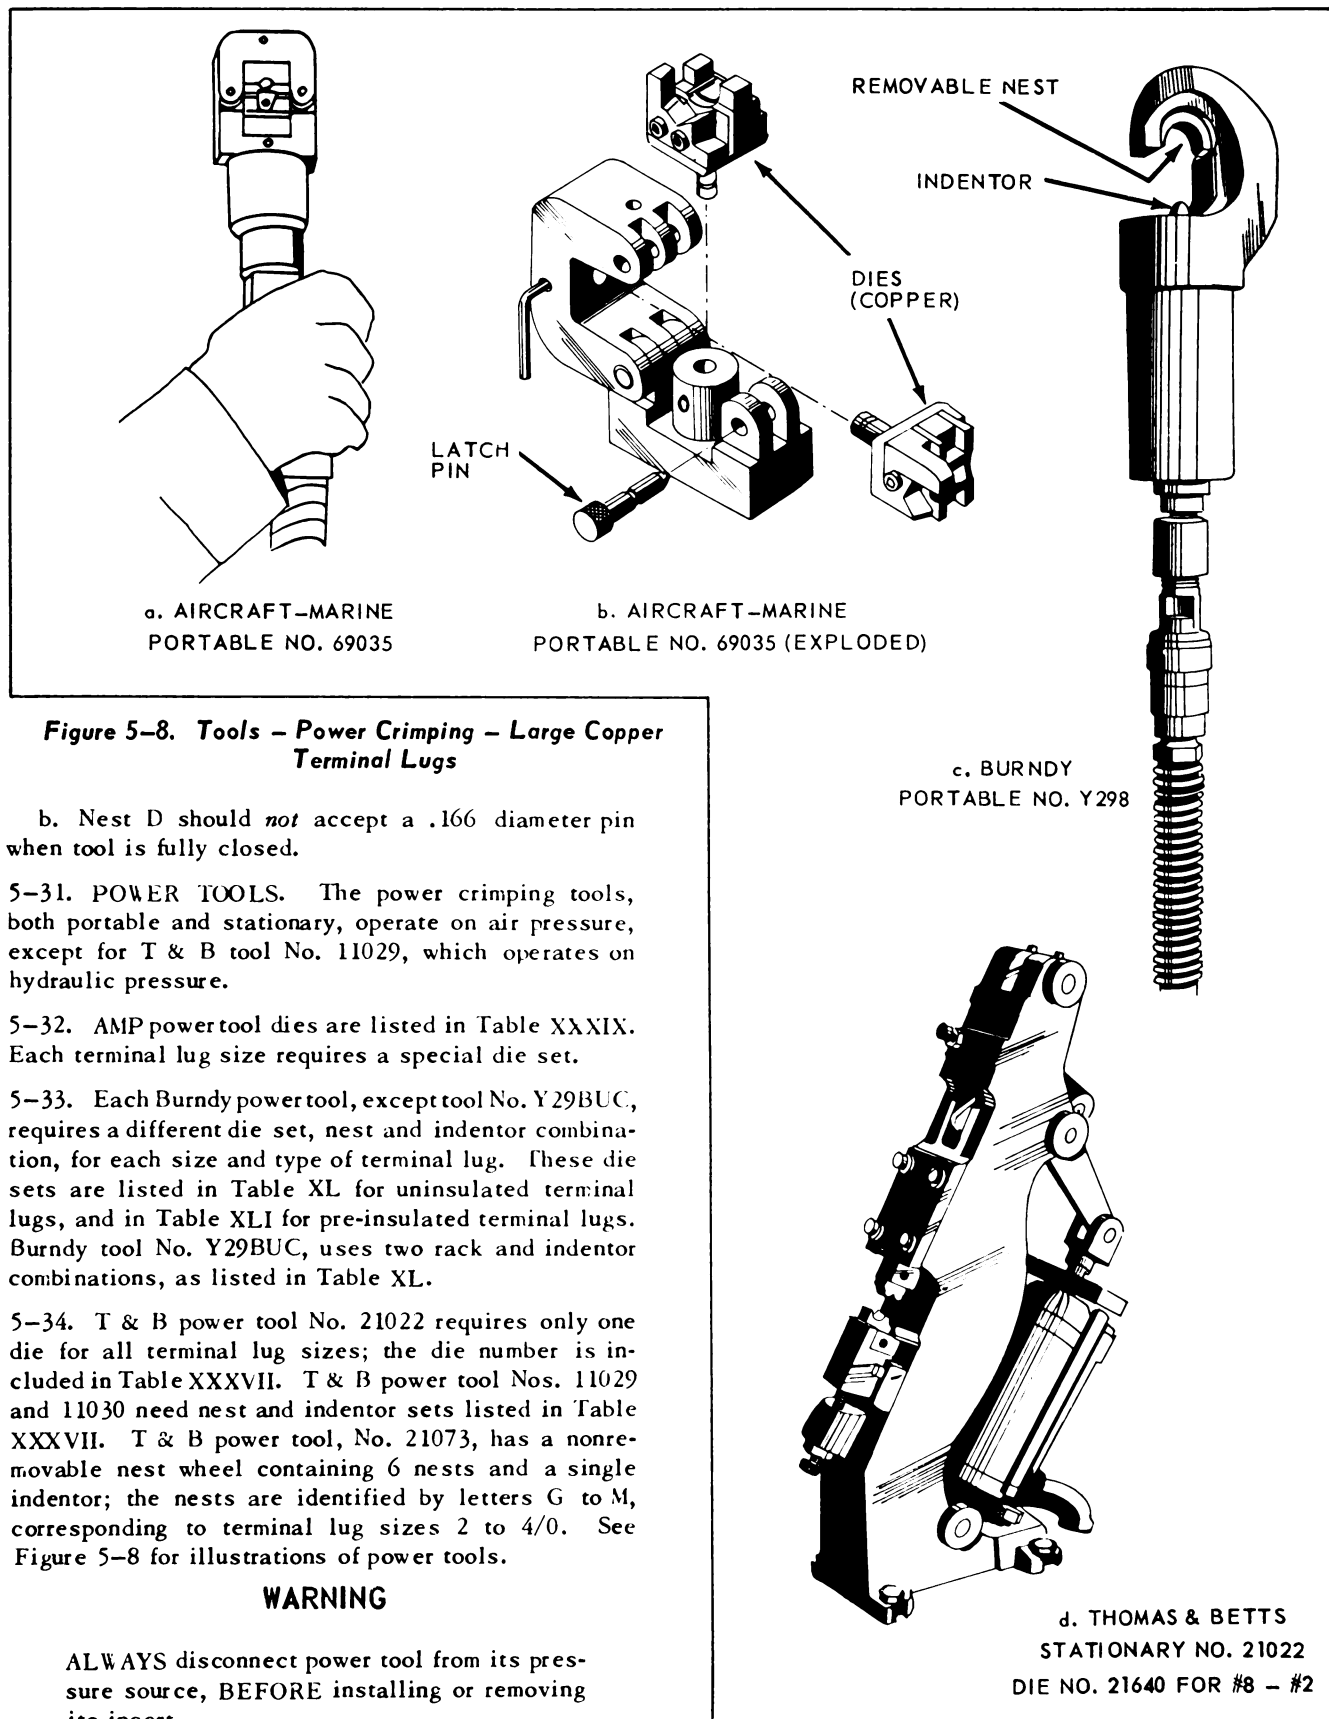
Tools - Power Crimping - Large Copper Terminal Lugs
